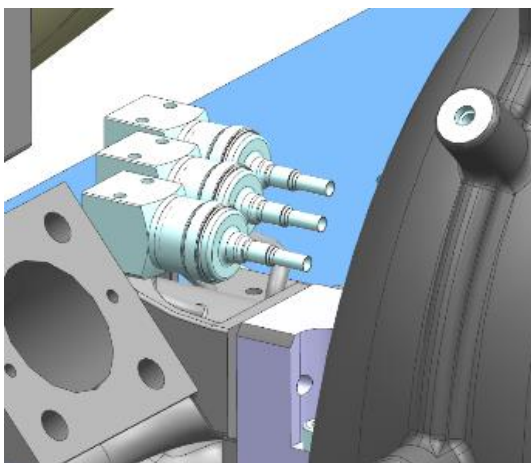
Placing pressure sensors so that they are removable from the part and that the cables have enough space to be routed.
